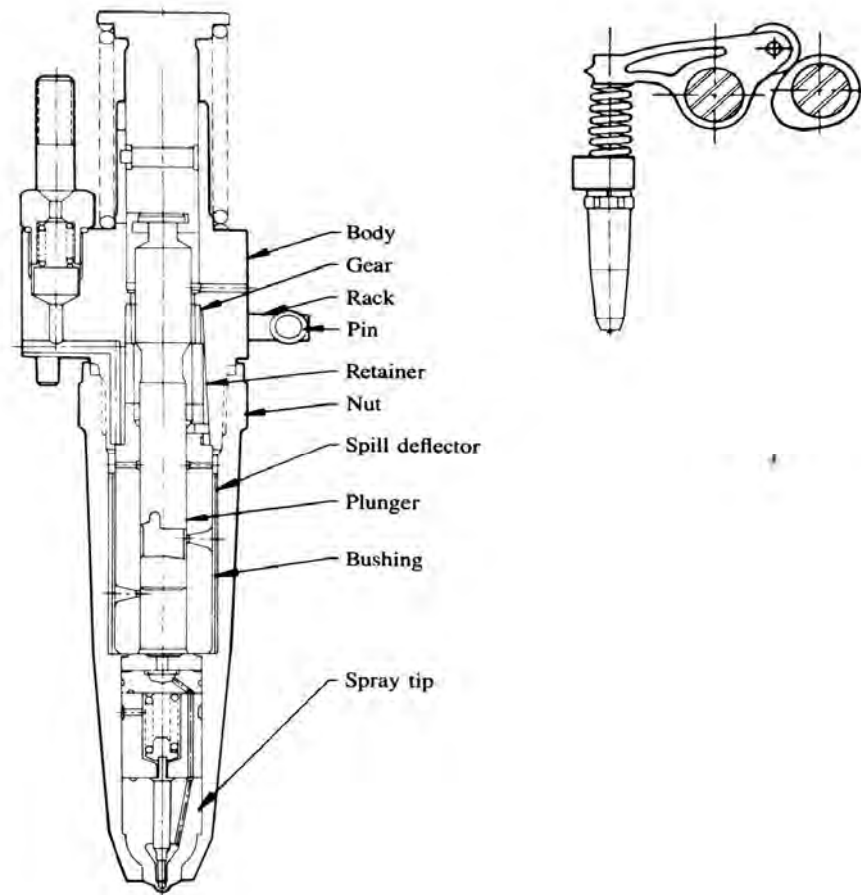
A cutaway view of a cam operated, pintle type fuel injector.
